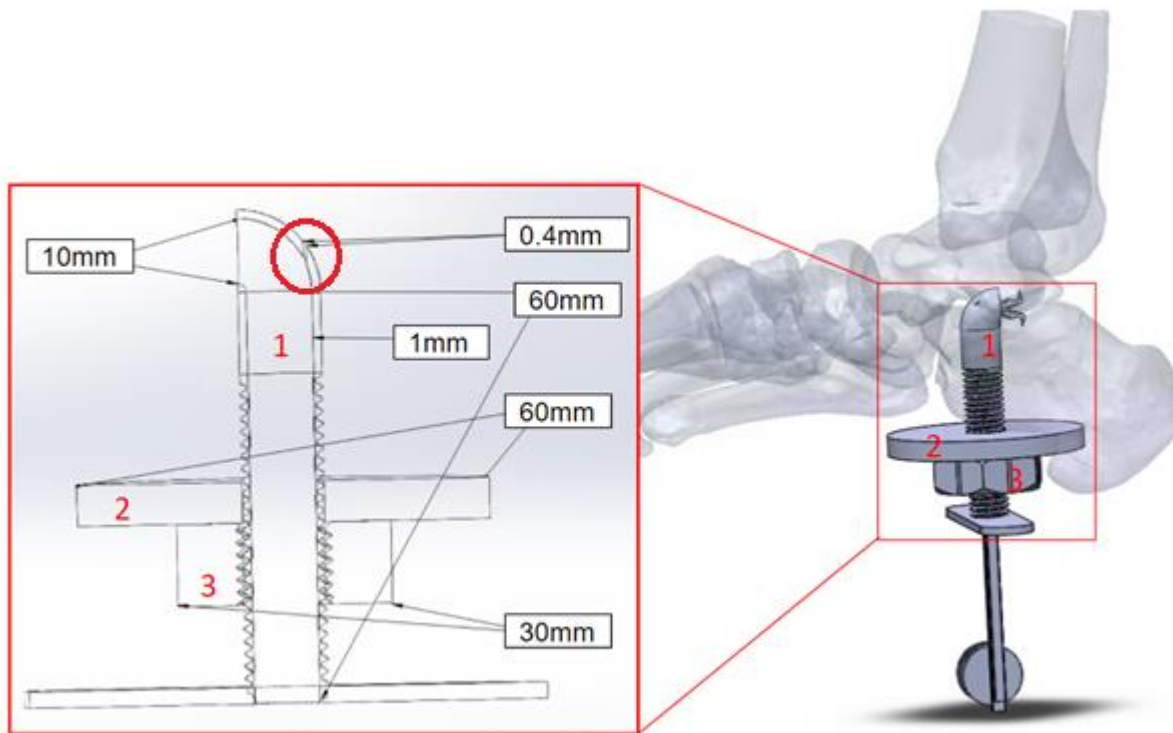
Scaled CAD model of guide tube, cutting tool, and foot. This figure displays the primed cutting position of the cutting tool and guide tube in the foot. A cross section of the guide tube is shown on the left, where 1 corresponds to the hollow bolt, 2 to the circular disk, and 3 to the nut. The red circle indicates a hole to accommodate for Kirschner wires used in the reaming of the ankle (discussed further in Section 2D).
